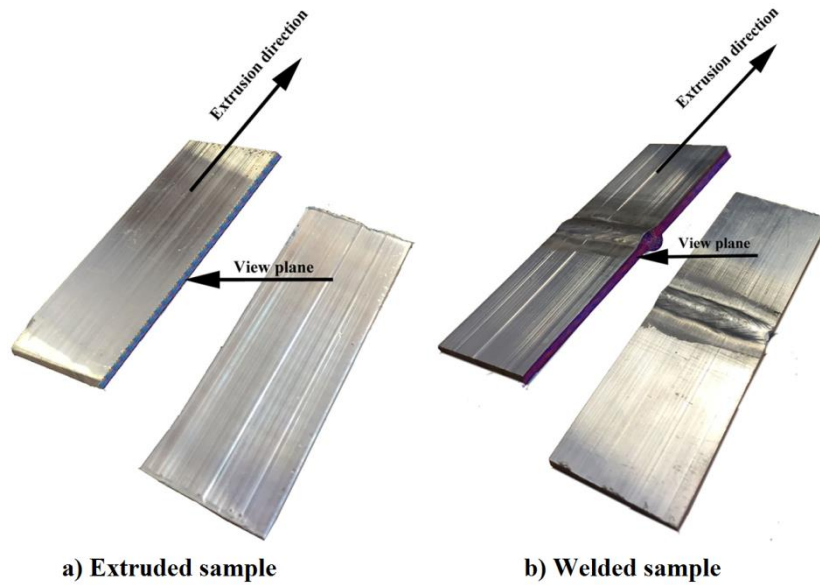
The specimens were cut in half along the extrusion direction and the view plane of both the extruded sample a) and welded sample b) is normal to the extrusion direction.
